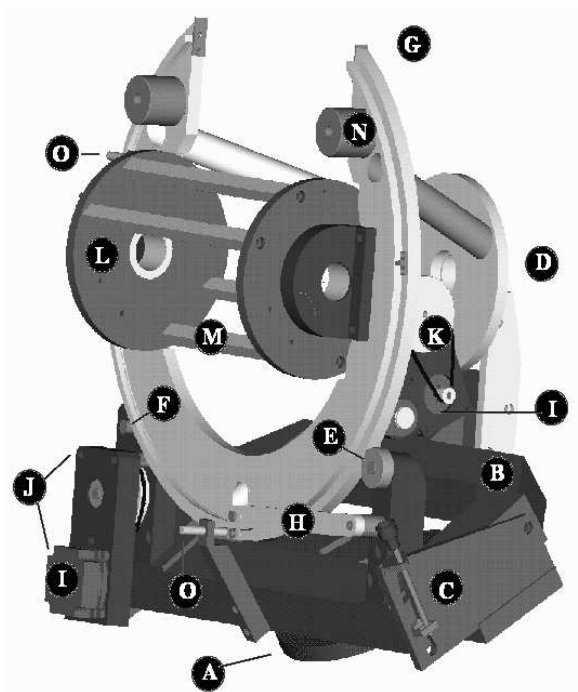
HAT mount drawing without the instrument mounting plate, CCD and lens. Labels on the image: A: main azimuth disc, B: rectangular base frame, C: altitude groove and adjusting spindle, D: RA bearing-housing and polar telescope hole, E: RA loose roller, F: RA friction-drive, G: horseshoe, H: horseshoe holding arm, I: RA and Dec stepper motors, J: RA driving mechanism: sprockets and cogwheels, K: Dec driving mechanism, L: Dec discs, M: Dec lateral bars, N: counterweights, O: proxy sensors.
